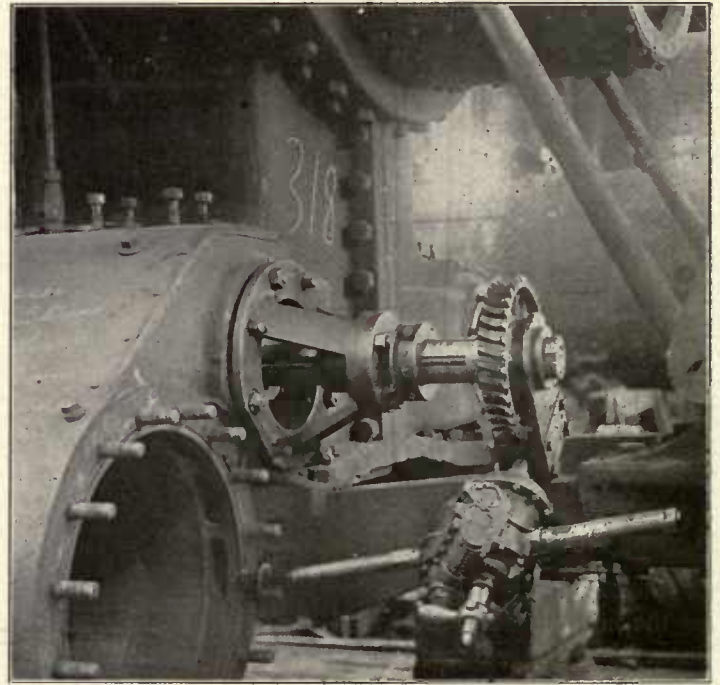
Application of Device for Boring Piston Valve Chambers.
